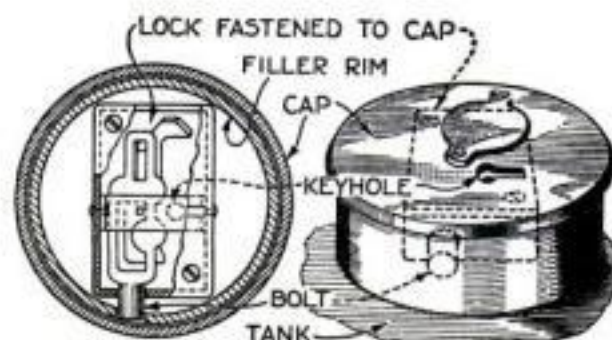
This fuel tank cap lock is an ordinary small cabinet door lock riveted or screwed in place under cap.
